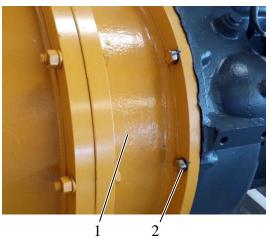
1 Flywheel transition housing 2. Bolt
